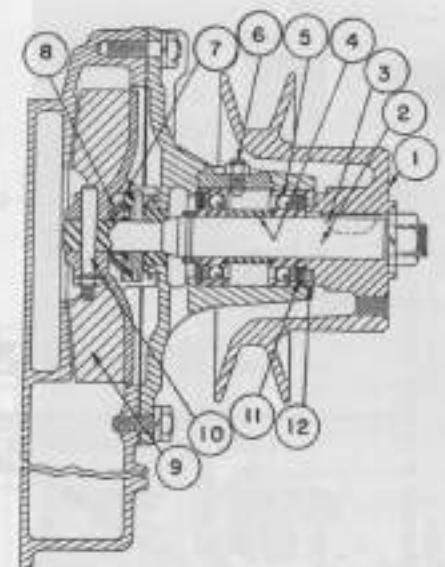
Sectional view of water pump as used on Continental engine models M390 and 330.
